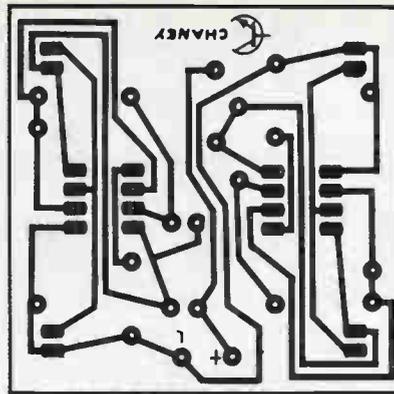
If you prefer to etch your own board, use this full-sized foil pattern of the PC board.
